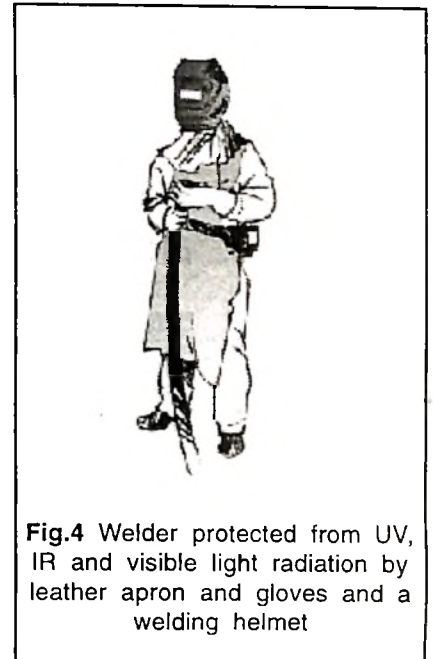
Welder protected from UV, IR and visible light radiation by leather apron and gloves and a welding helmet
